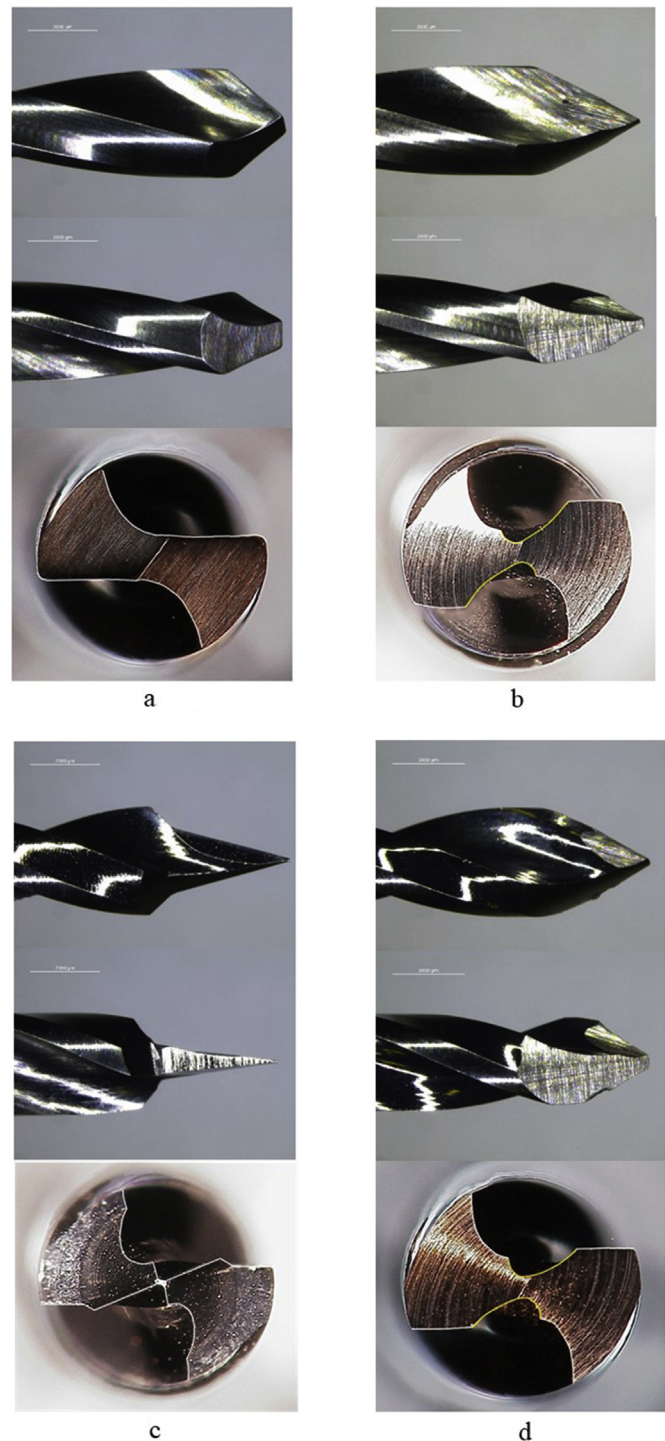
(a) Drill A (Johnson & Johnson). (b) Drill AG (Gekkou-modified Drill A). (c) Drill B (Zimmer Biomet). (d) Drill BG (Gekkou-modified Drill B). The yellow line shows the crescent-shaped cutting line in end-view photographs of (b) and (d).
